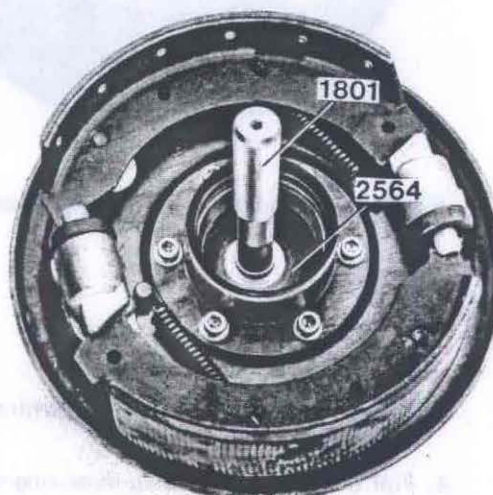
Removing the inner bearing outer ring and inner sealing ring
